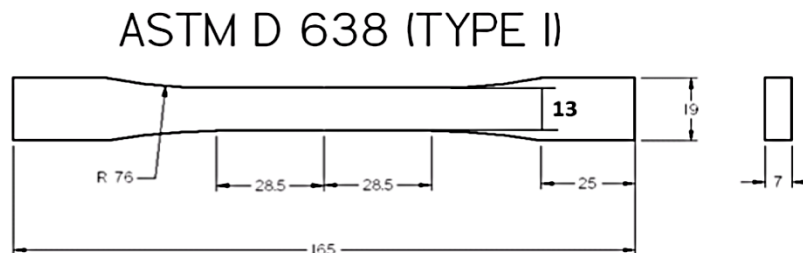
Tensile test specimen according to ASTM D638 type 1 standard
